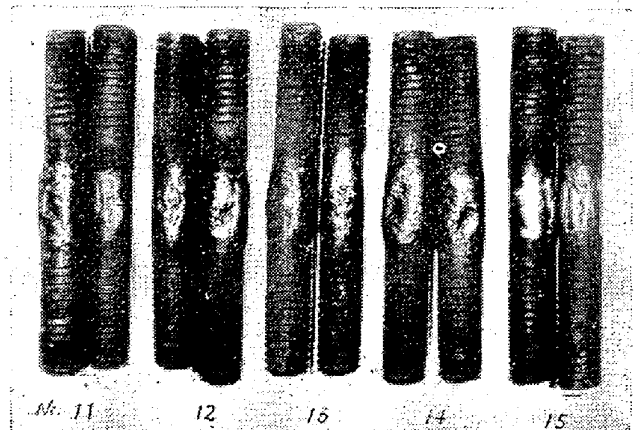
Surfaces of the deposits as welded (Welded with the similar electrodes) of S-816.
